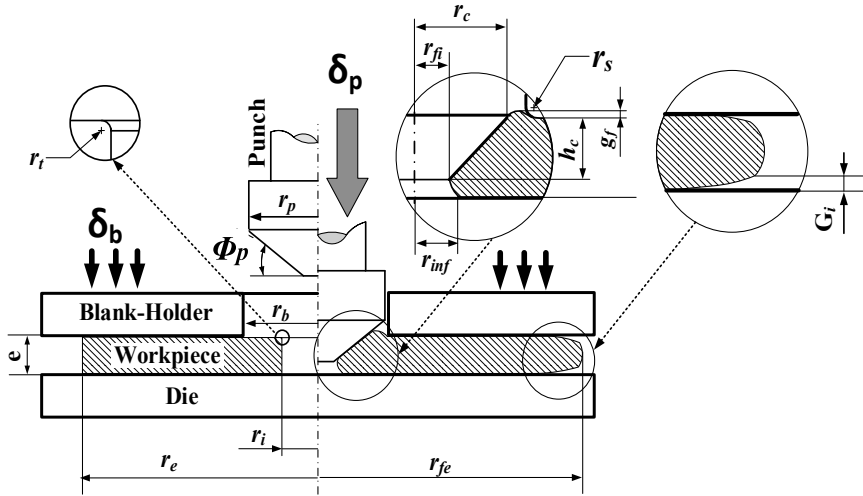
Workpiece and tools parameters before and after countersinking, Hassen et al. [5]
